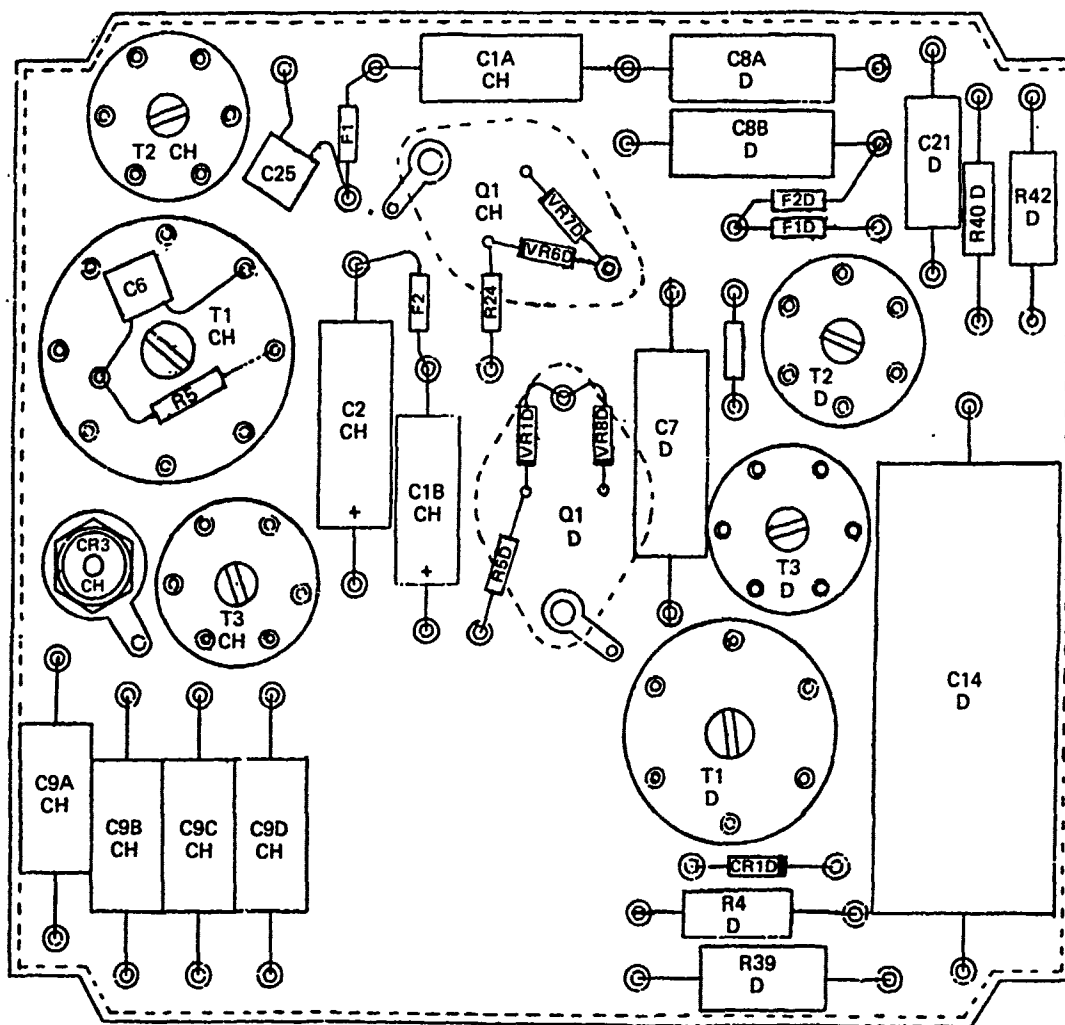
Plasma generator electronics (shelf 2) assembly component layout.
